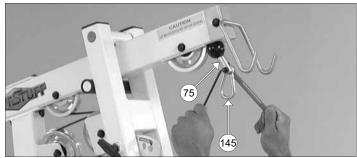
Next, attach one Snap Link (#145) to the Clevis Bracket (#75) using one Shoulder Bolt 3/8 X 3/4 (#144), and one Nylon Insert Lock Nut 5/16-18 (#120). Use the supplied Hex Key 3/16" (#107) and a 1/2" combination wrench to fasten this assembly properly.
